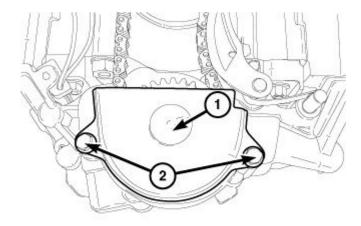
Oil Pump Solenoid Electrical Connector & Primary Chain Tensioner Mounting Bolt Courtesy of CHRYSLER GROUP, LLC
